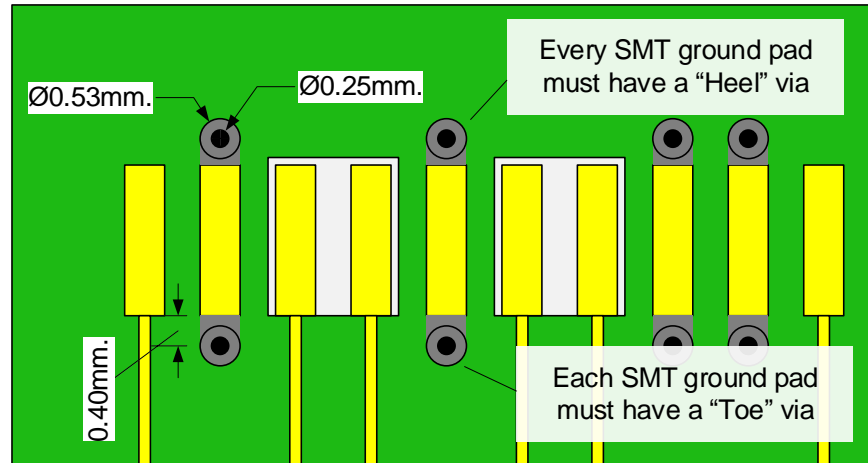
System Board PCI Express Connector SMT Footprint, Highlighting the Location of Heel and Toe Ground Vias
